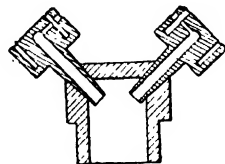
Section of Acetylene Burner giving Splayed Flat Flame.
